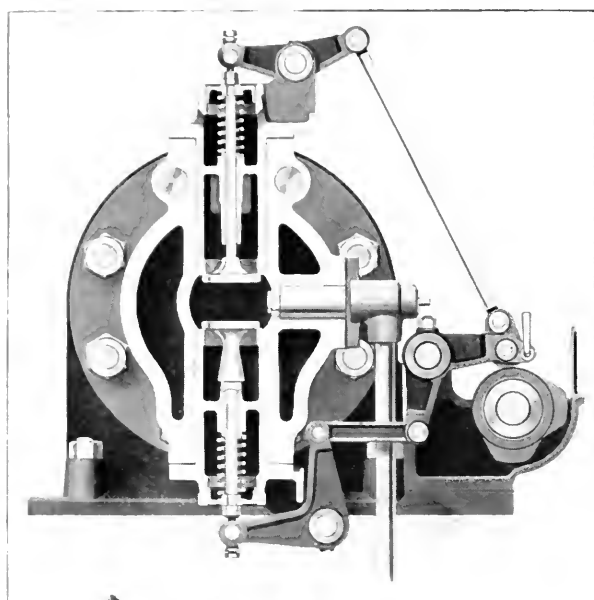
SECTION THROUGH VALVE CHAMBER OF MCEWEN HIGH-COMPRESSION OIL ENGINE
